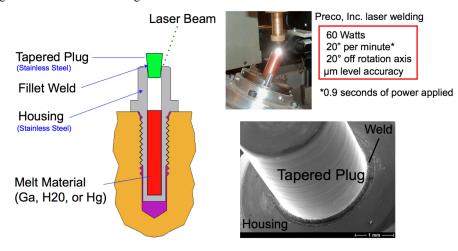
Laser welding of the tapered plug into the stainless steel housing that contains the phase change materials.
